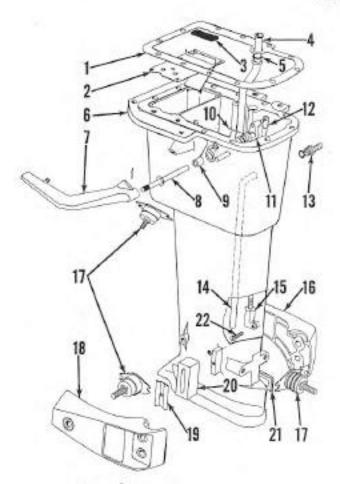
Exploded view of lower motor housing and associated parts.
